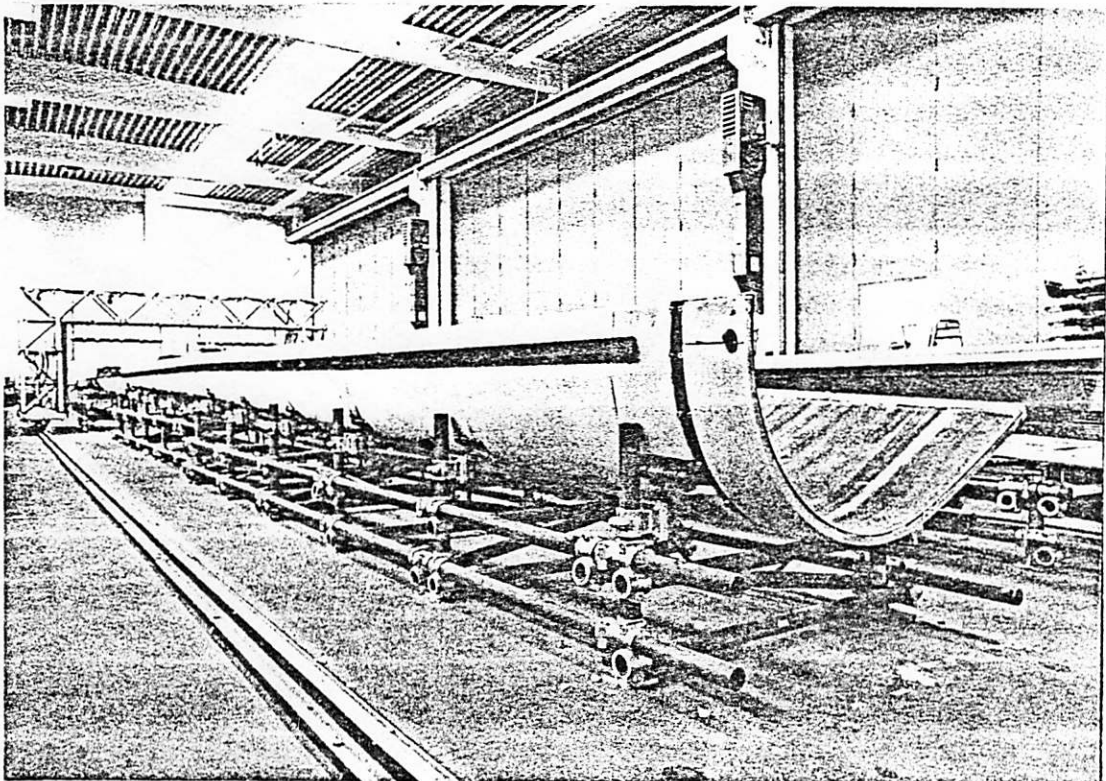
MOULD MADE OF FORMED STEEL PLATES
